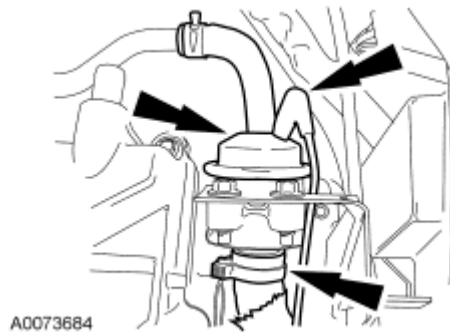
Locating Secondary Air Injection Vacuum Regulator Electrical Connector And Vacuum Hose
